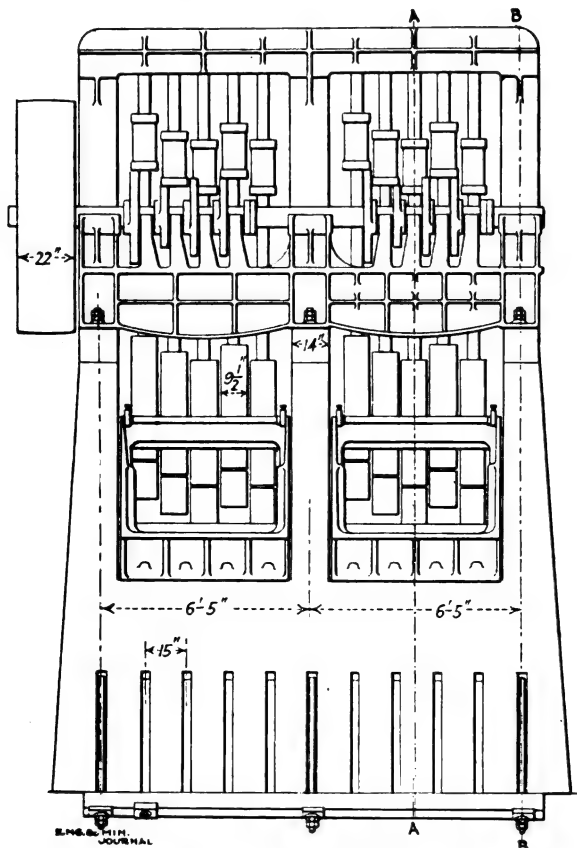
FRONT ELEVATION OF CITY DEEP BATTERY.
